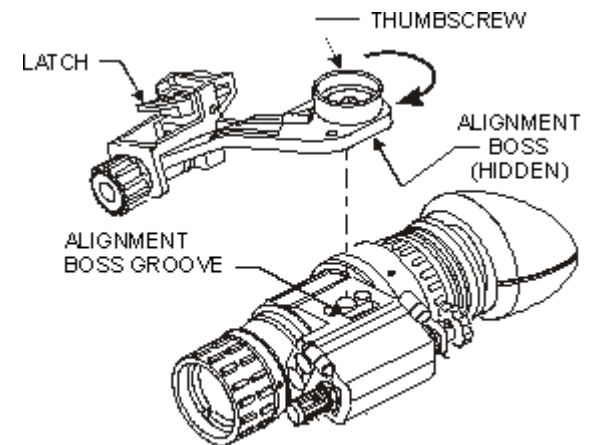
Headmount/Helmet Mount Adapter Installation.
